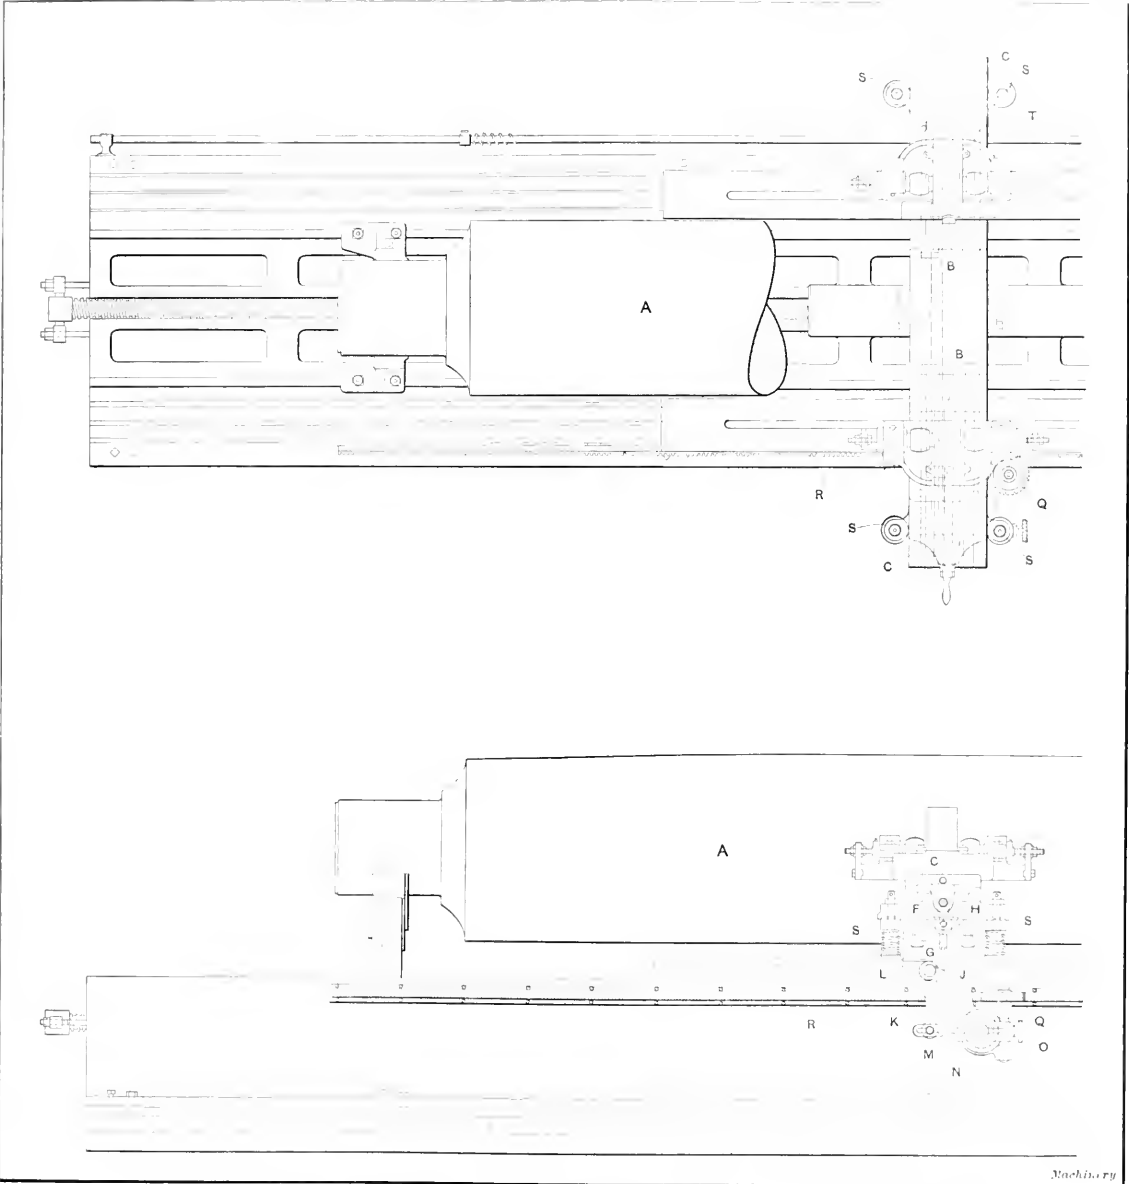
Plan and Elevation of Lobdell Roll Grinding Machine showing Construction of Carriage and Crowning Device
